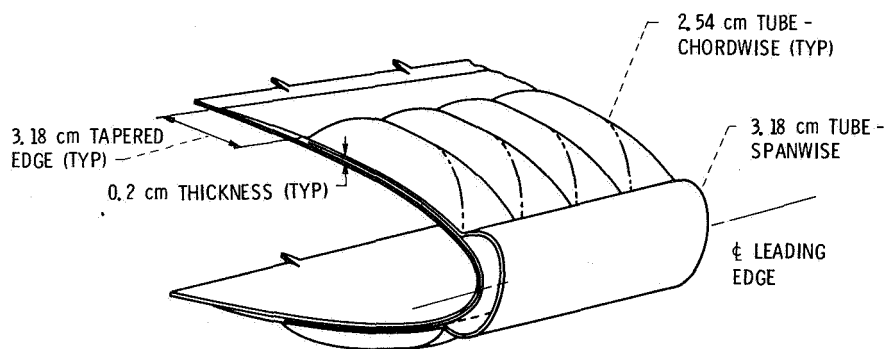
Typical cross section of installed deicer (inflated), large tube.
